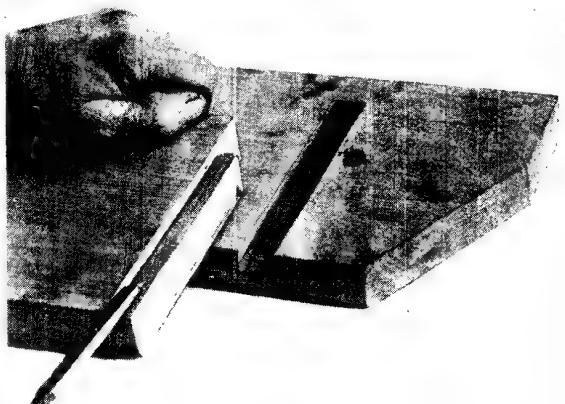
This is a dovetail, stopped housing joint, and is an improved form of the joints in Figs. 2 and 3, being much more rigid
